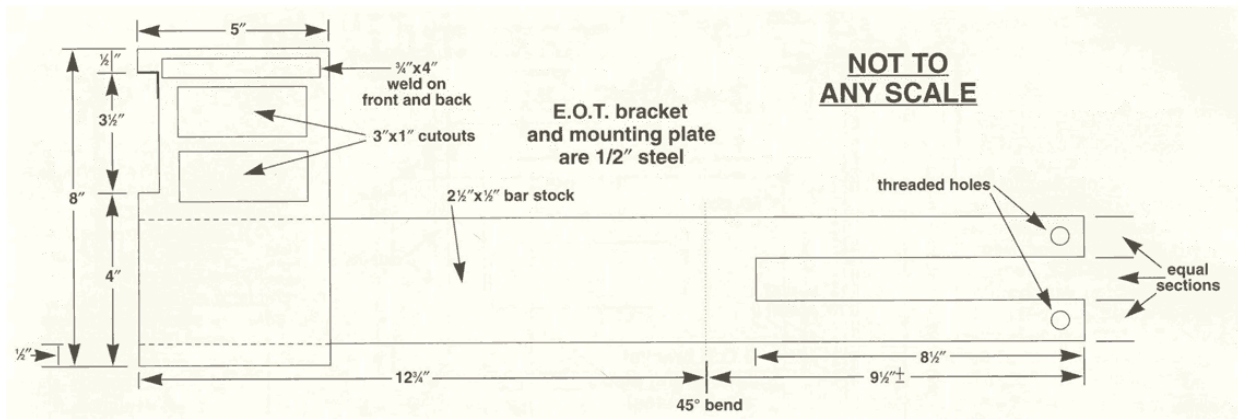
E.O.T. coupler draft hole mounting bracket (side view)
